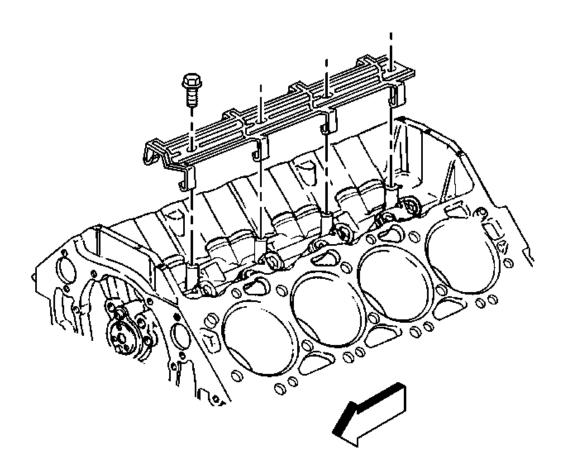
View Of Valve Lifter Guide Retainer Courtesy of GENERAL MOTORS CORP.
